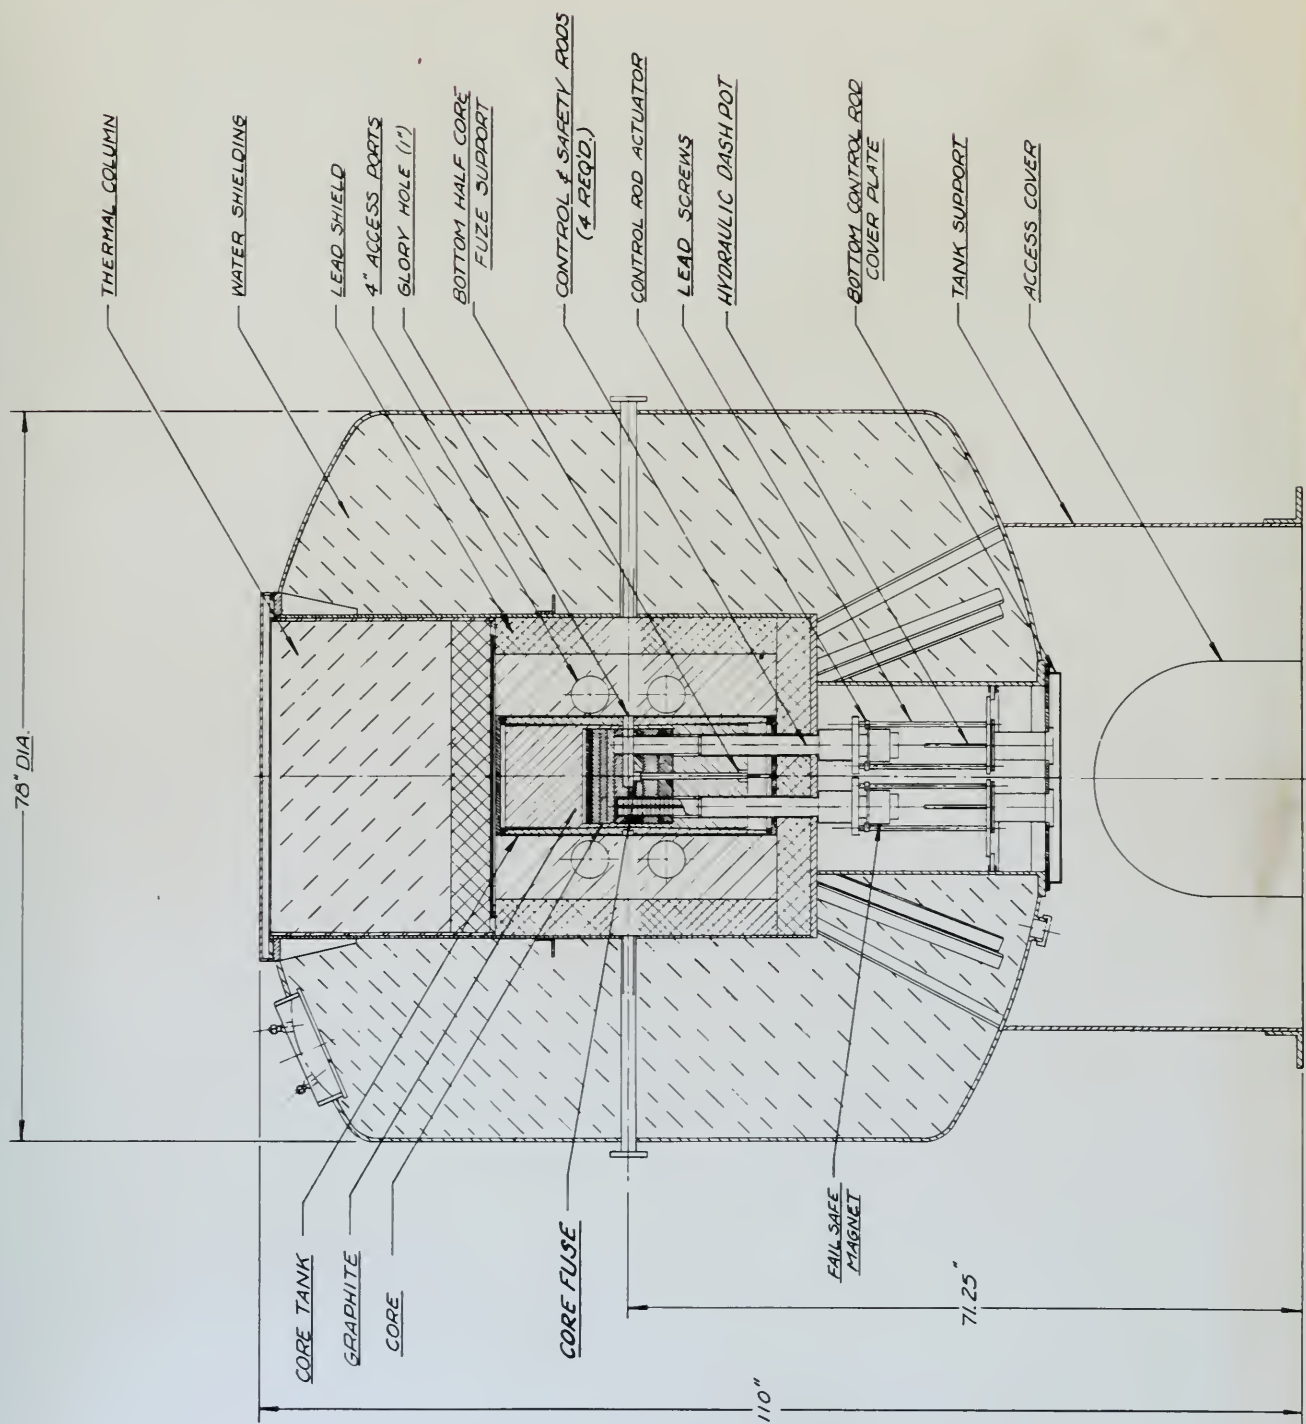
VIEW OF SIMULATED REACTOR, AGN-201, CORE TANK ASSEMBLY
